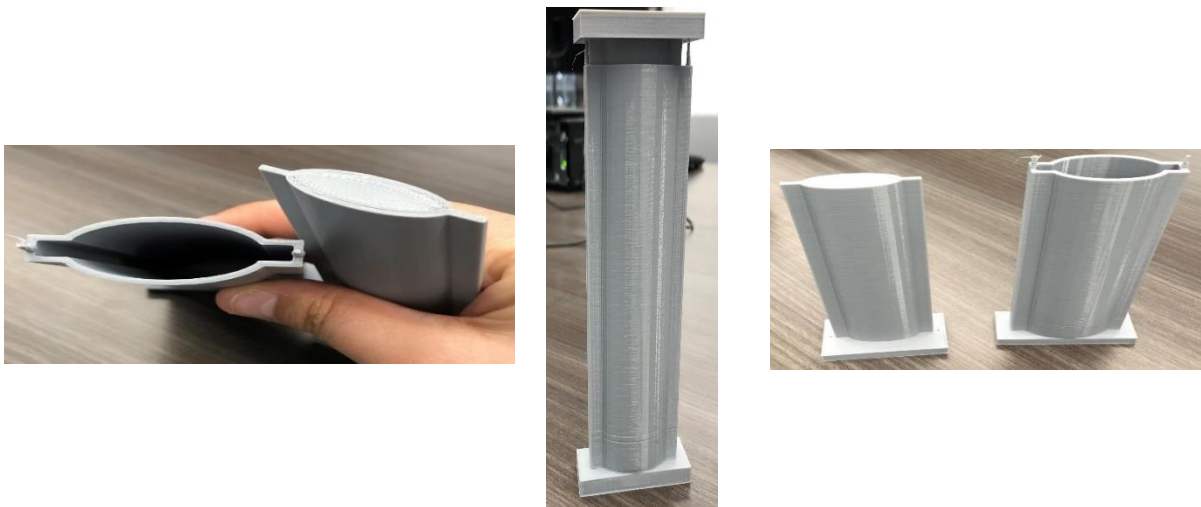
3-D Printed Parts of First Iteration of Gel Mold
